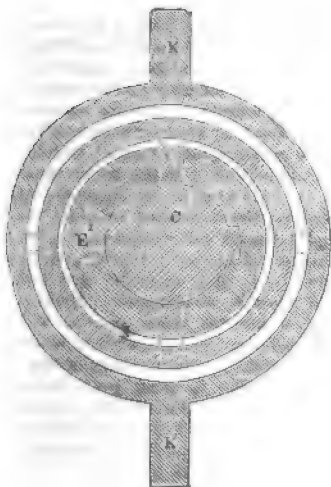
is a top plan, and fig. 2 a sectional elevation of this machine.
